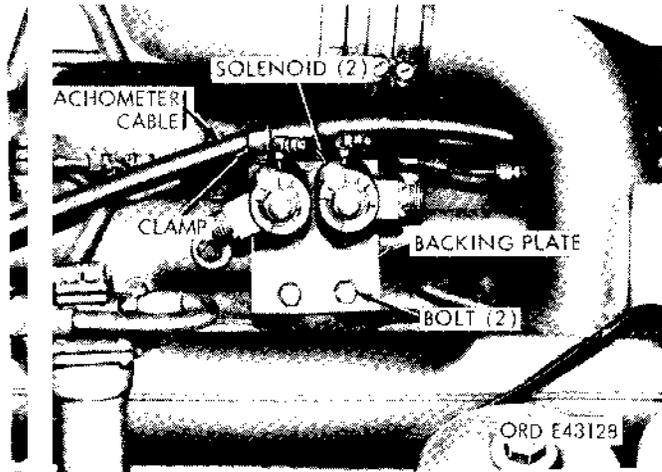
Removing two-valve solenoid assembly—diesel models.
